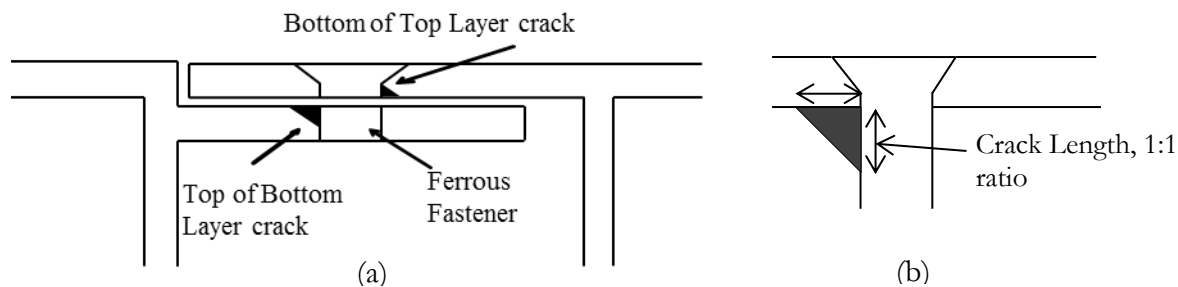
Cross-section of lap joint (a), where the two sections are attached using a row of fasteners, and (b) close up of crack location showing aspect ratio of 1:1.
